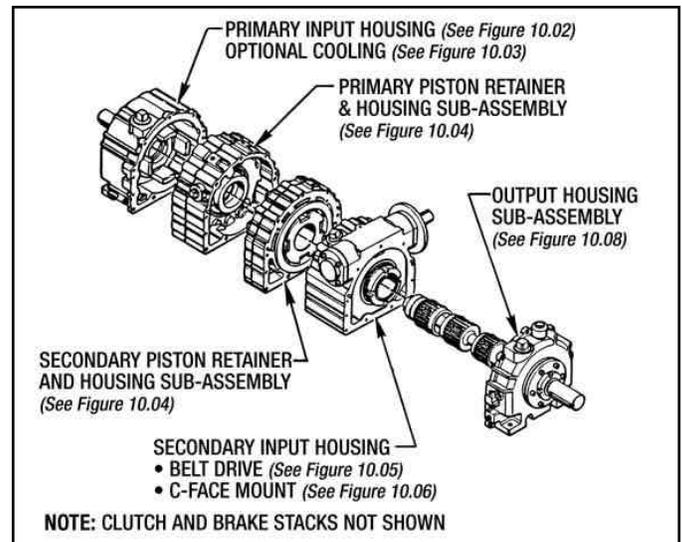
Multi-Speed Drive (MSDr) Sub-Assemblies
